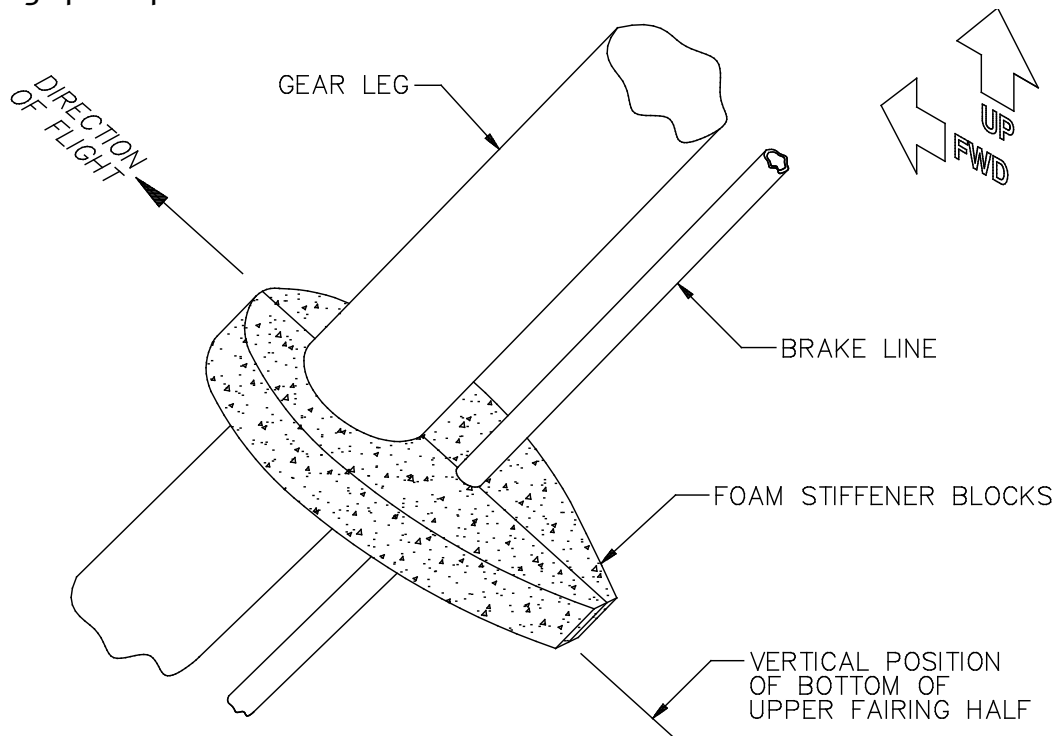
Gluing the Stiffener Blocks to the Gear Leg
